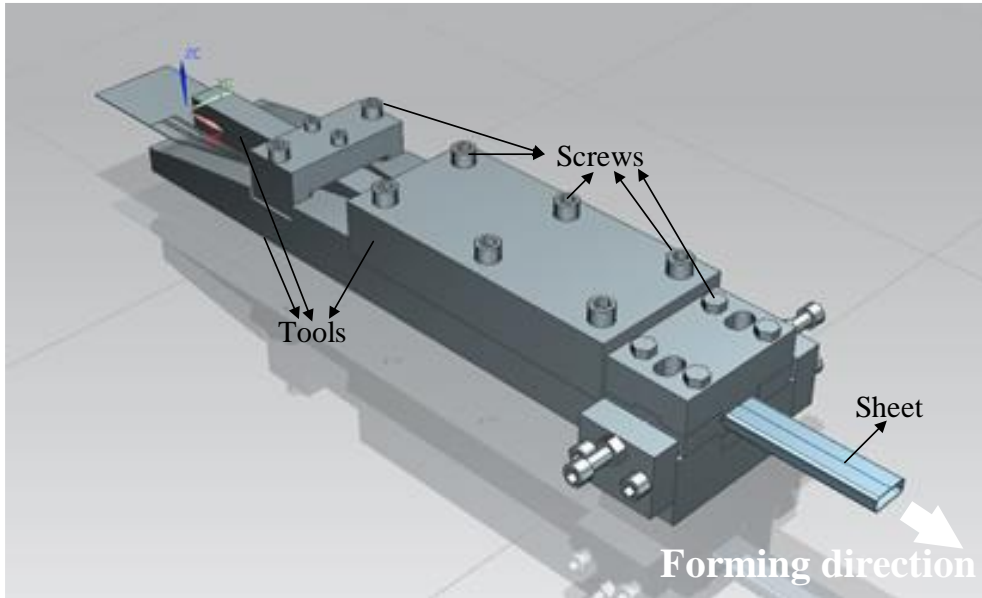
Prototype forming machine which is newly developed under press-forming scheme
